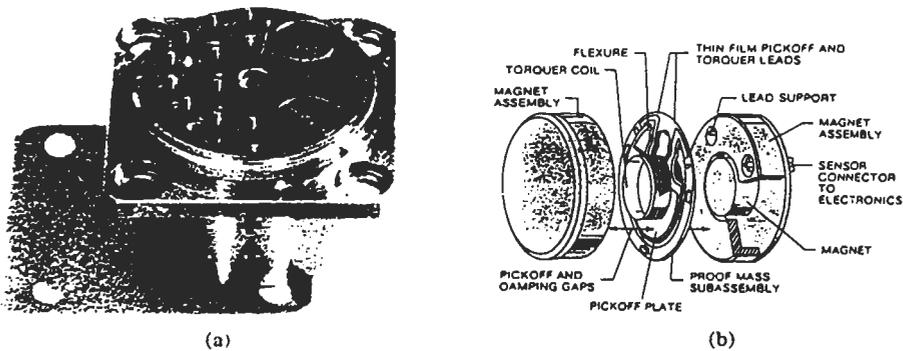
Servo-controlled “single-axis” Sunstrand accelerometer: (a) accelerometer photograph; (b) exploded view of the accelerometer. (Courtesy Sunstrand [102].)
